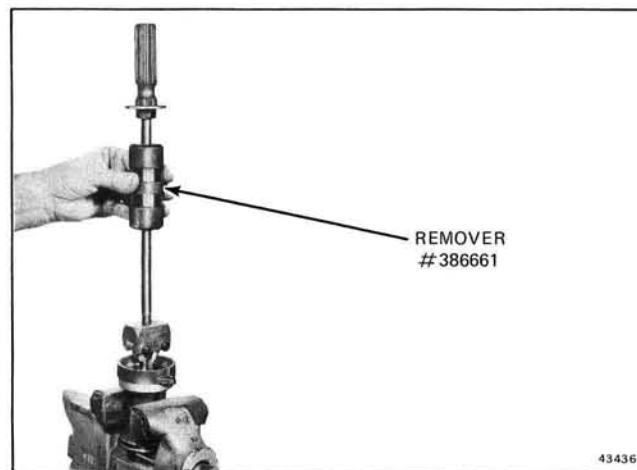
Removing Gearcase Bearing Housing Aft Seals
